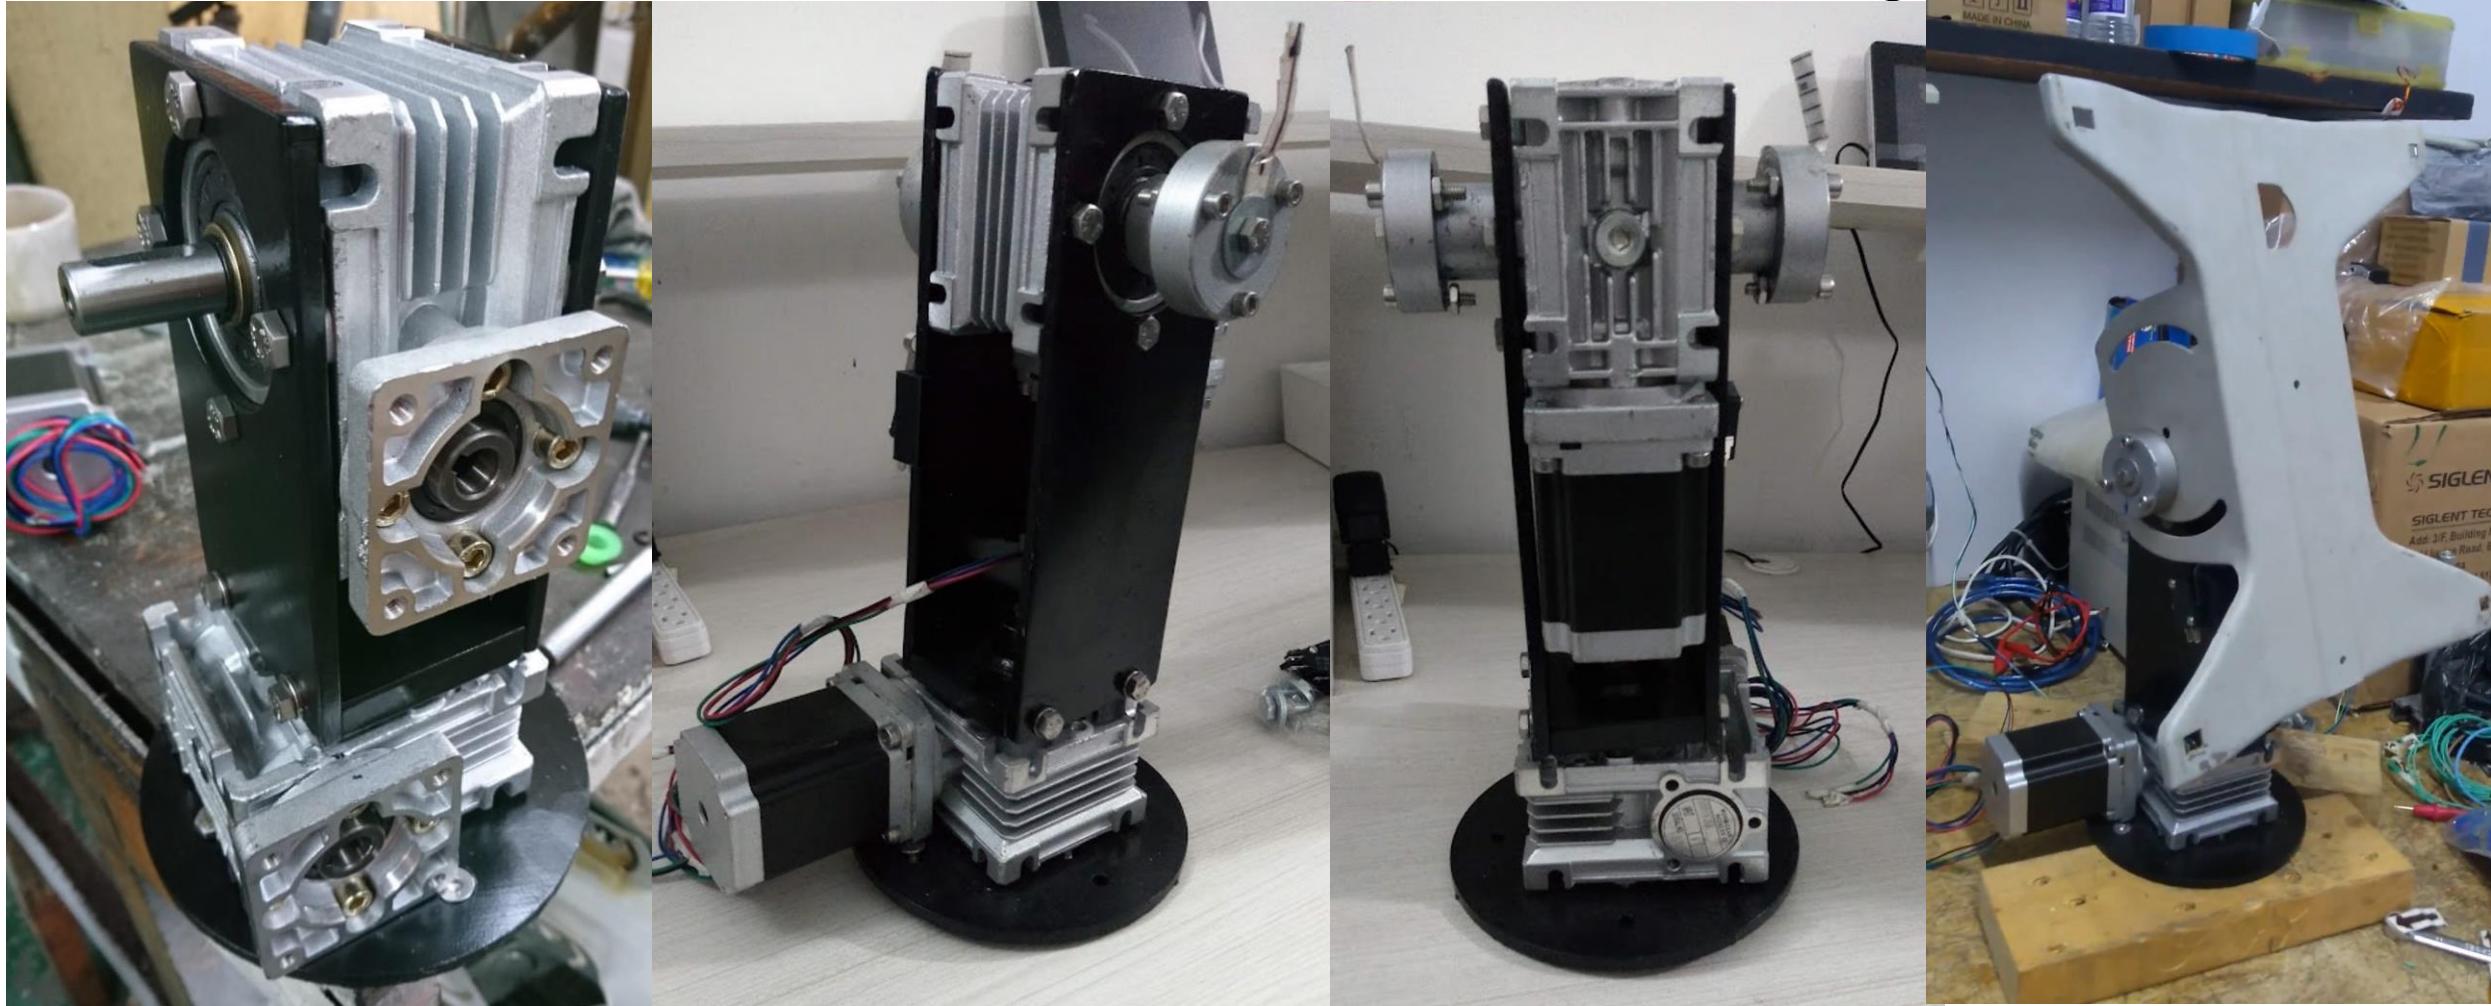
Steerable Pier Assembly: Stepper Motor & Reducer Gearbox for each axis in Alt-Az motion. (Hincapié Tarquino et. al. in. prep.)
